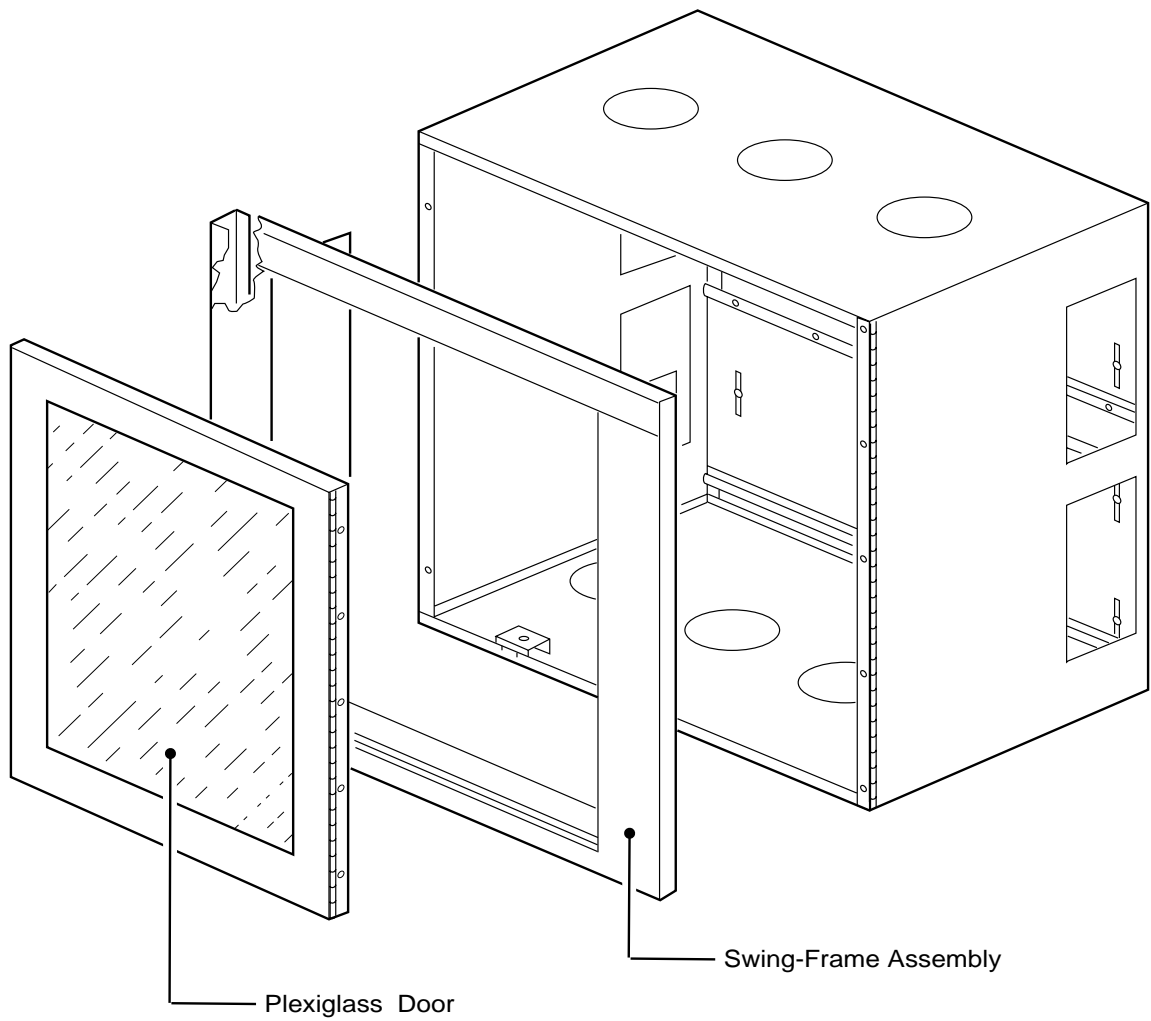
J-Series Codec Demarcation Cabinet — Exploded View
